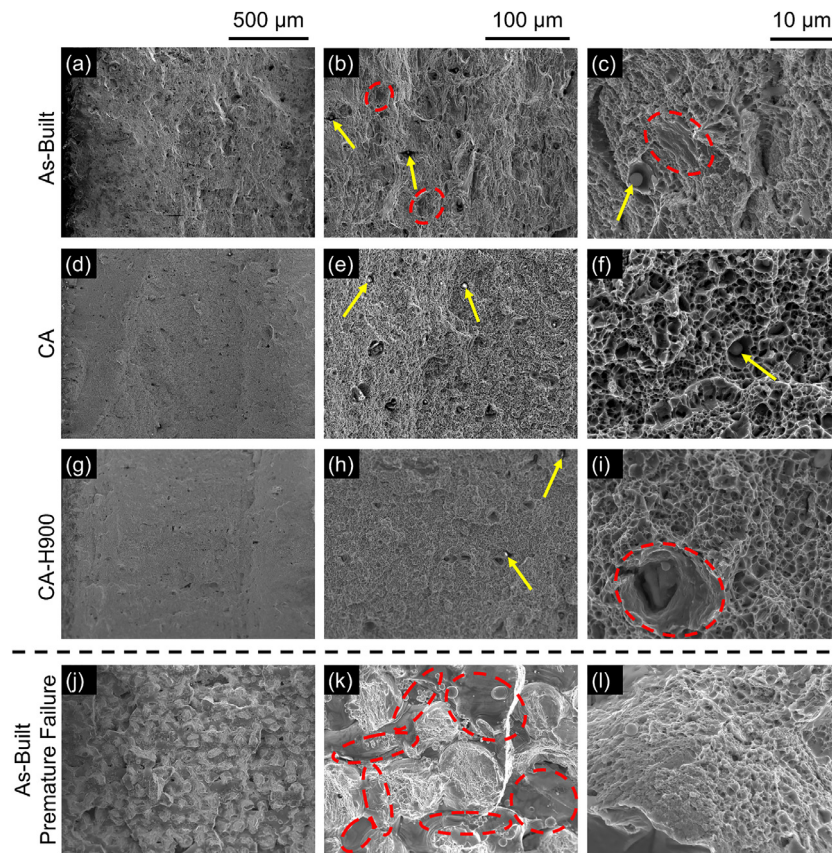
Representative fracture surfaces from horizontally built tensile test specimens with the (a–i) Raster samples. (a–c) As-built, (d–f) CA, (g–i) CA-H900. (j–l) As-built samples fabricated using Hex LP processing parameters that underwent premature failure. Each scale bar applies to each column of subfigures. Yellow arrows indicate hard particles observed on the surfaces. The red, dashed ellipses indicate smooth regions of the fracture surface.
